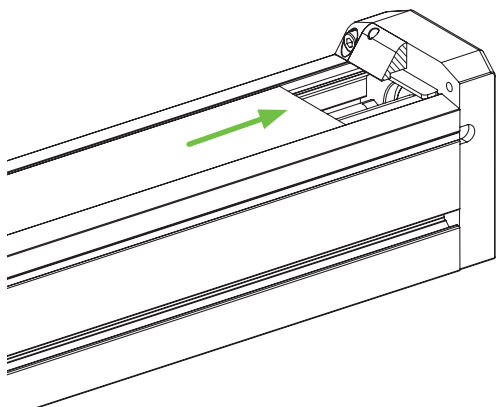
Installing the cover strip in the cover strip clamp on the and linear module HM-S
